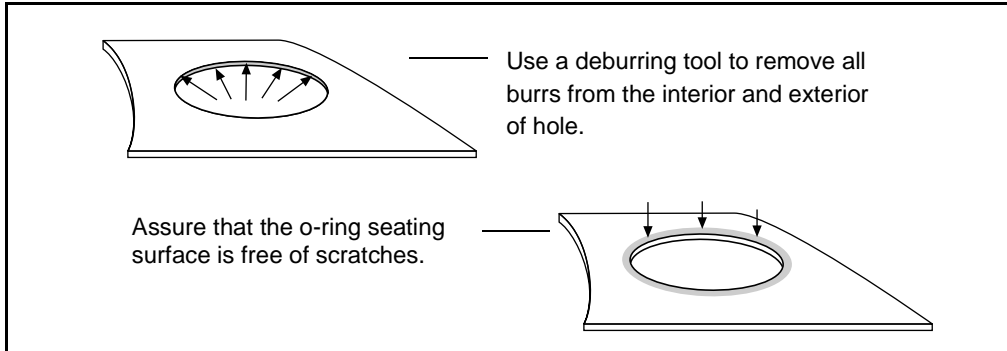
Burr Removal and O-Ring Seal Surface Inspection
